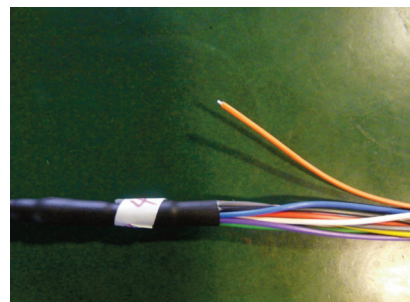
Failed Cable Pull and Cable Flex Tests for MPO/MTP-to-LC Hybrid Assemblies
